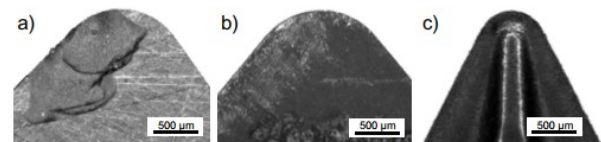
Tool wear following complementary machining can be classified as either a) uncoated type I, b) coated type I, or c) coated type II without lubrication [59].
